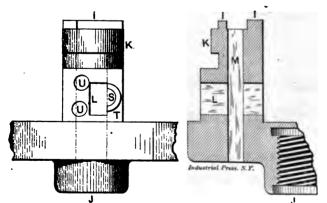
Details of Body of Chuck, showing Broached Holes for Jaw and Wedge,
